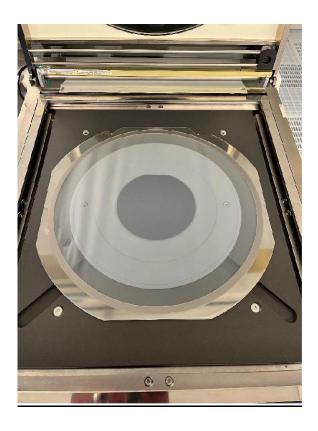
Mounted sample in Wafer Tape Applicator machine with excess tape removed.
